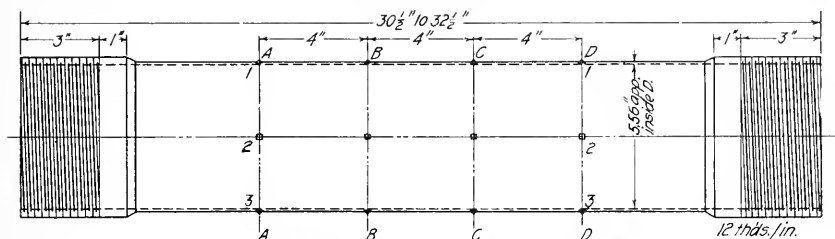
DIMENSIONS OF TUBE TEST SPECIMEN.
